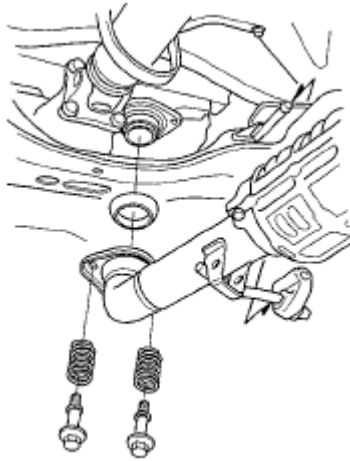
Identifying Three Way Catalytic Converter Front Joint
